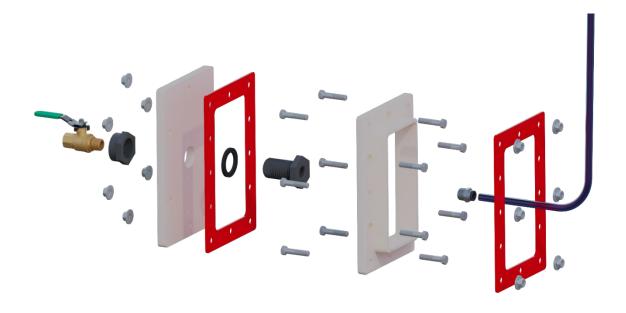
XchangeTech Coil Drain Valve Exploded View
